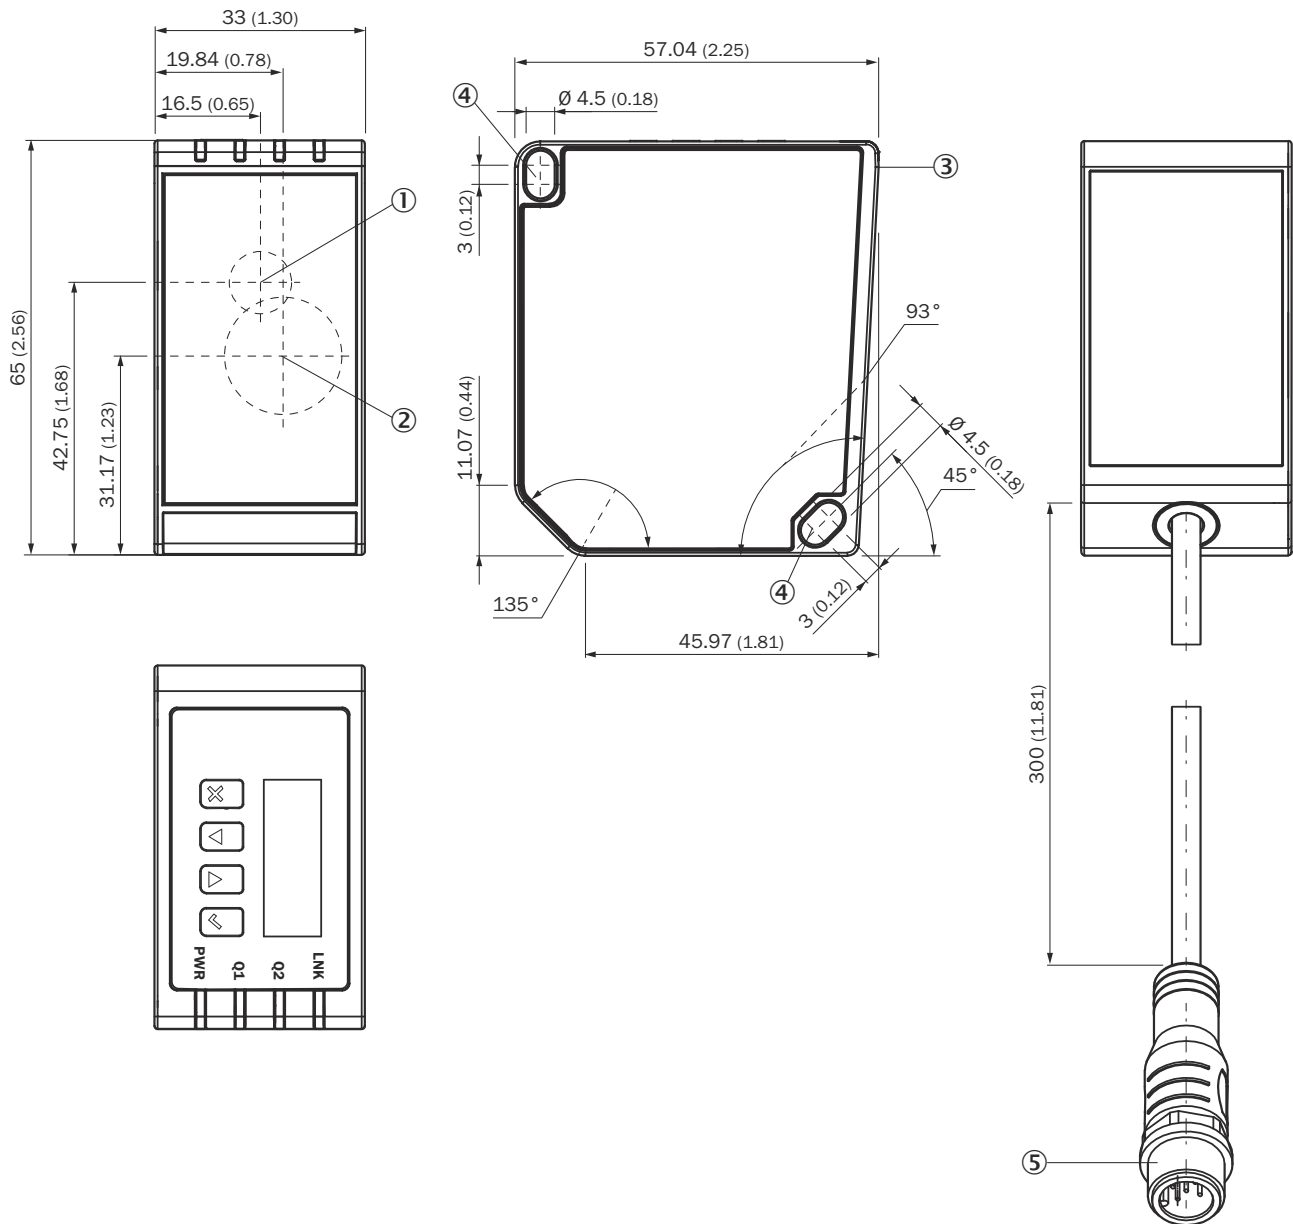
Dimensional drawing for DT80 IO-Link; All dimensions in mm (inch), decimal separator: point
